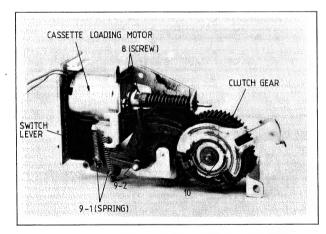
Cassette Loading Motor/Switch Lever/Cluth Gear
